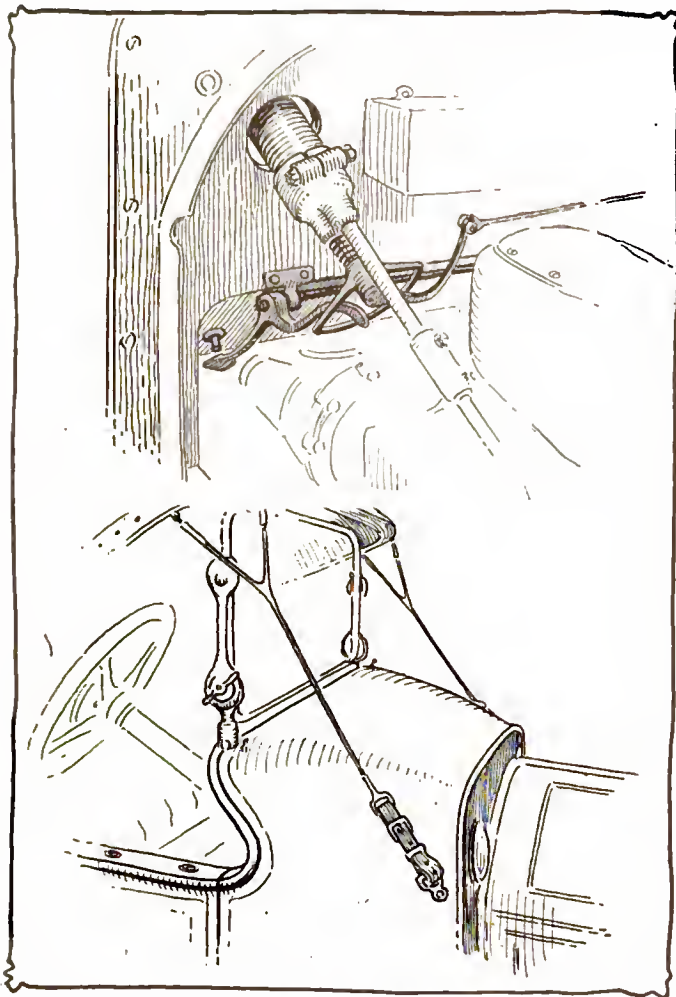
A, Paige throttle and spark cam control; B, Oakland top strap attachment
